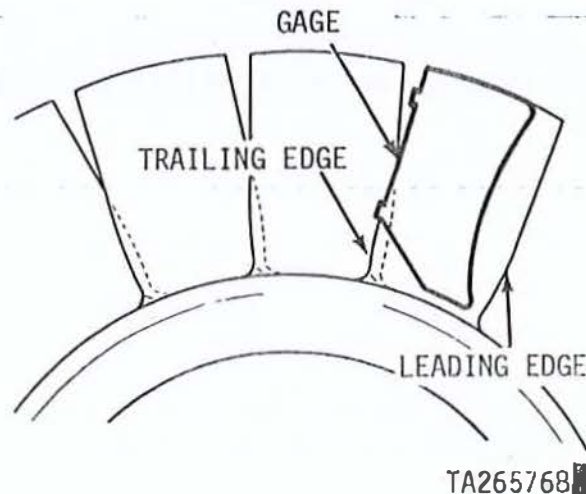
Testing blade erosion with gage superimposed on fan rotor blade
